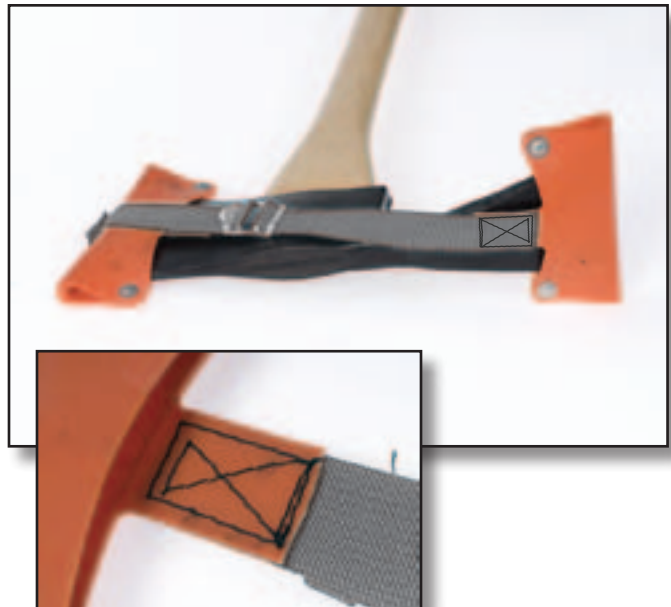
Sew 1-inch-wide webbing to the plastic strap, using six to eight stitches (inset) of heavy duty nylon thread per inch. The stitches in the larger photo were digitally enhanced so they could be seen clearly.
